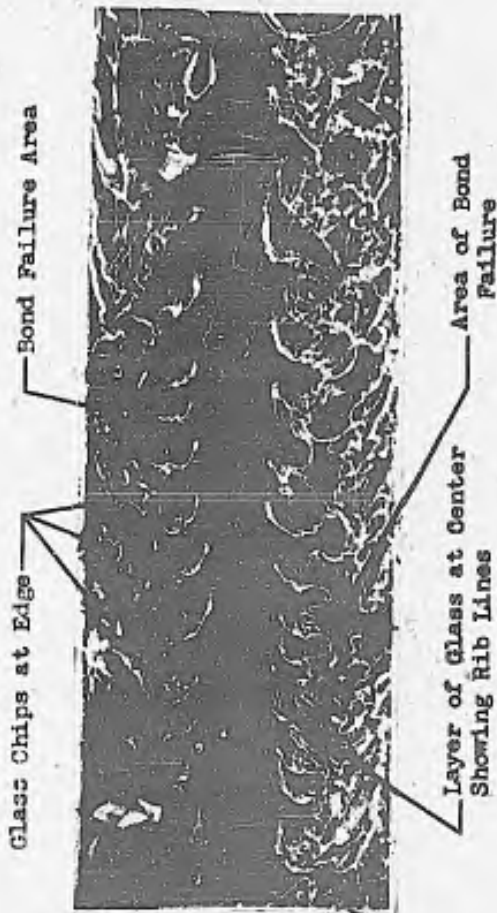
CHIPPING FAILURE IN ANNEALED GLASS -- TYPE 6A FAILURE
